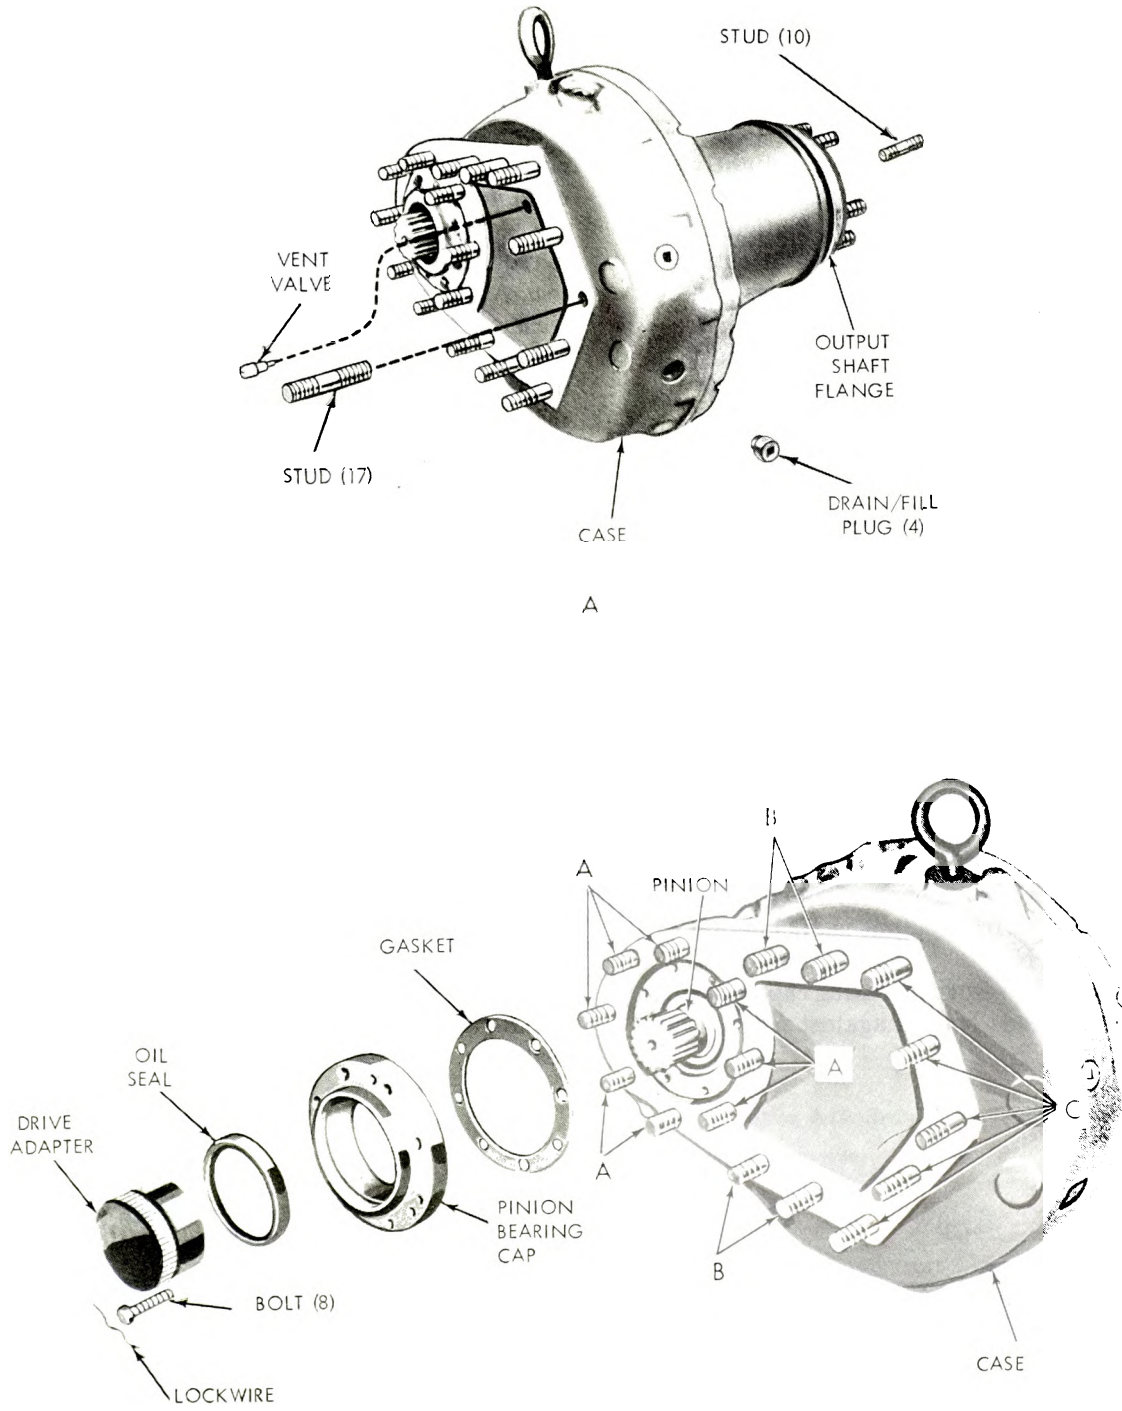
Final drive disassembly and assembly (sheet 1 of 4).
